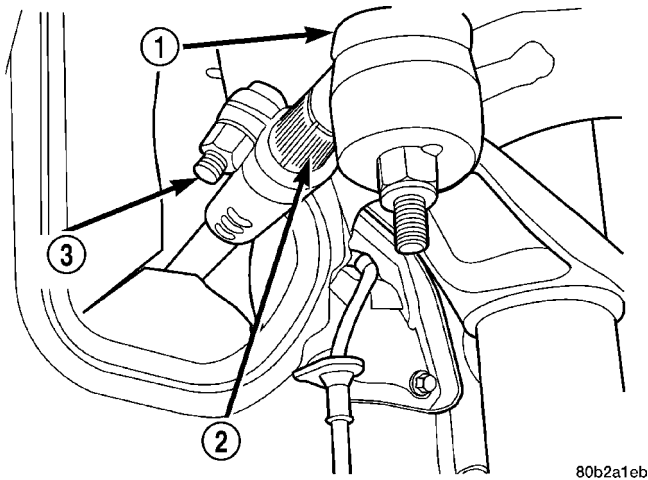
Tie Rod Adjustment Sleeve Pinch Bolt
